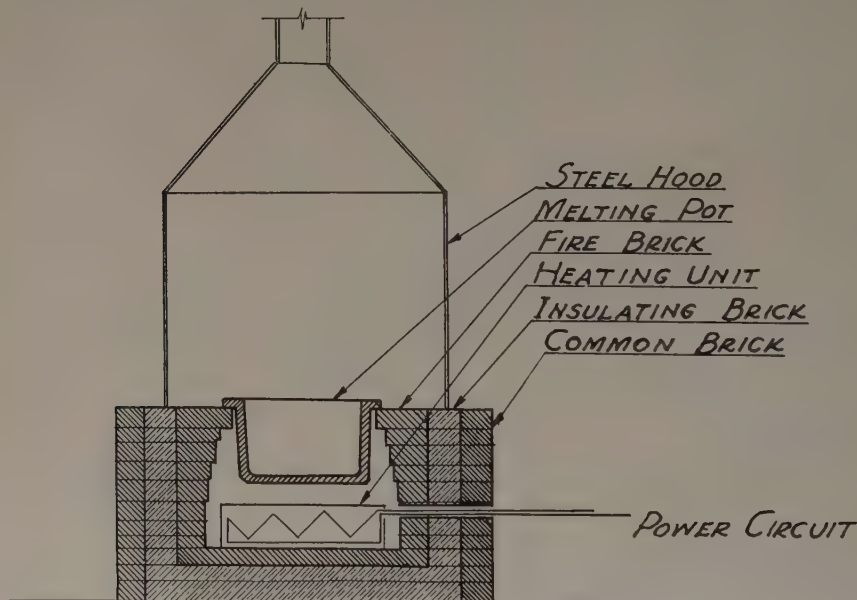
SECTION OF CADMIUM ELECTRICAL MELTING POT.
